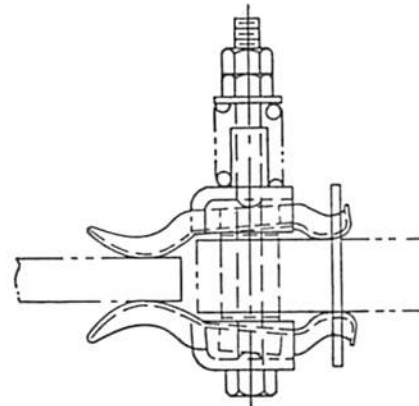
A. Primary disconnect assembly (for AK-50), Ref. No. 220.
